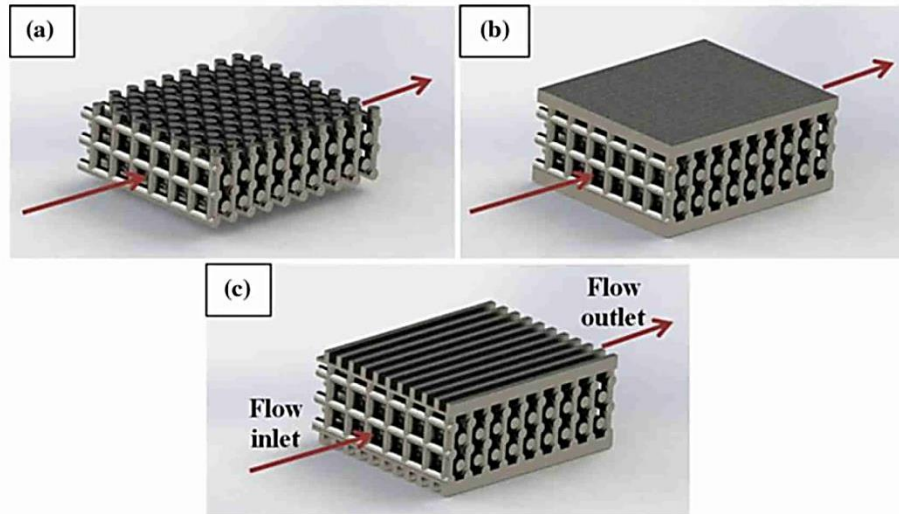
Successive steps to manufacture wire mesh heat exchanger: (a) stacked wire mesh, (b) brazed thin metallic sheets, (c) machined external fins
